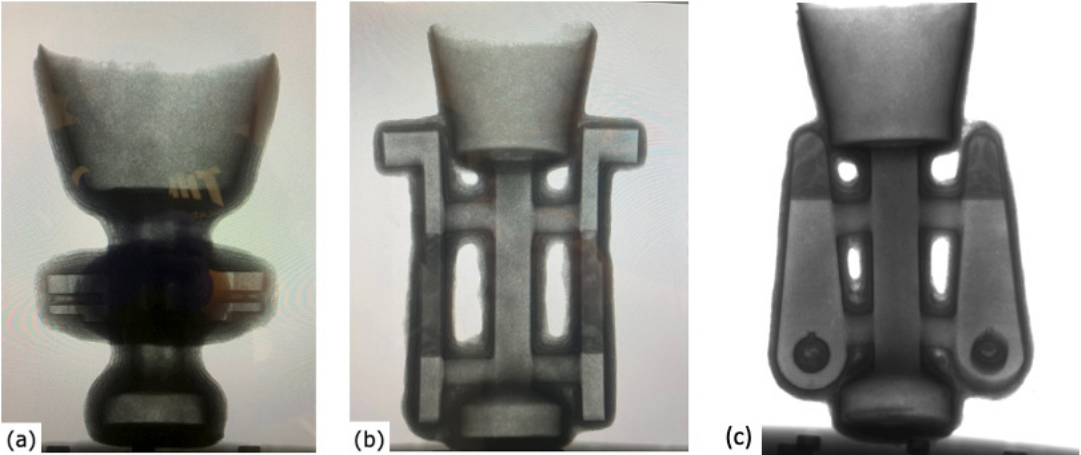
CT scan results of ceramic shells after burnout: (a) Part#12314649 casting tree assembly; (b) Part#12446263 casting tree assembly; (c) Part#154072 casting tree assembly.
